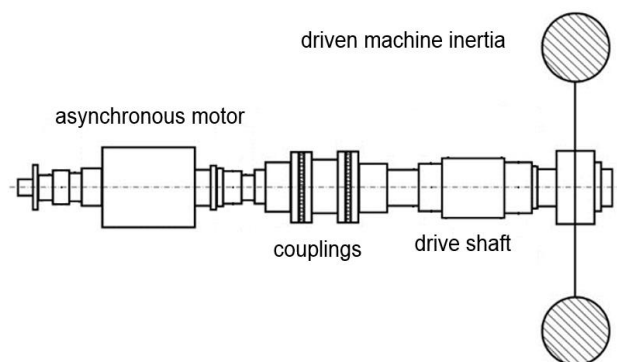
Scheme of the drive system of the rotating machine driven by an asynchronous motor
